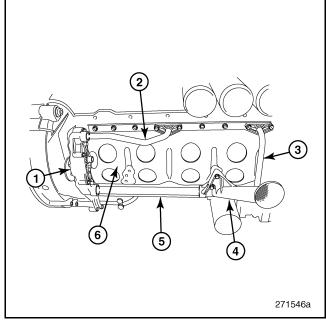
Inlet, Outlet and Crossover Pipes (Front Sump Shown)
